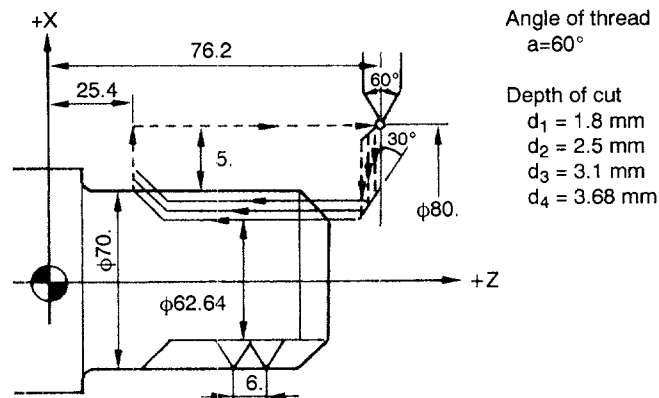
Straight Thread Cutting Cycle (In-feed Along Thread Angle)
